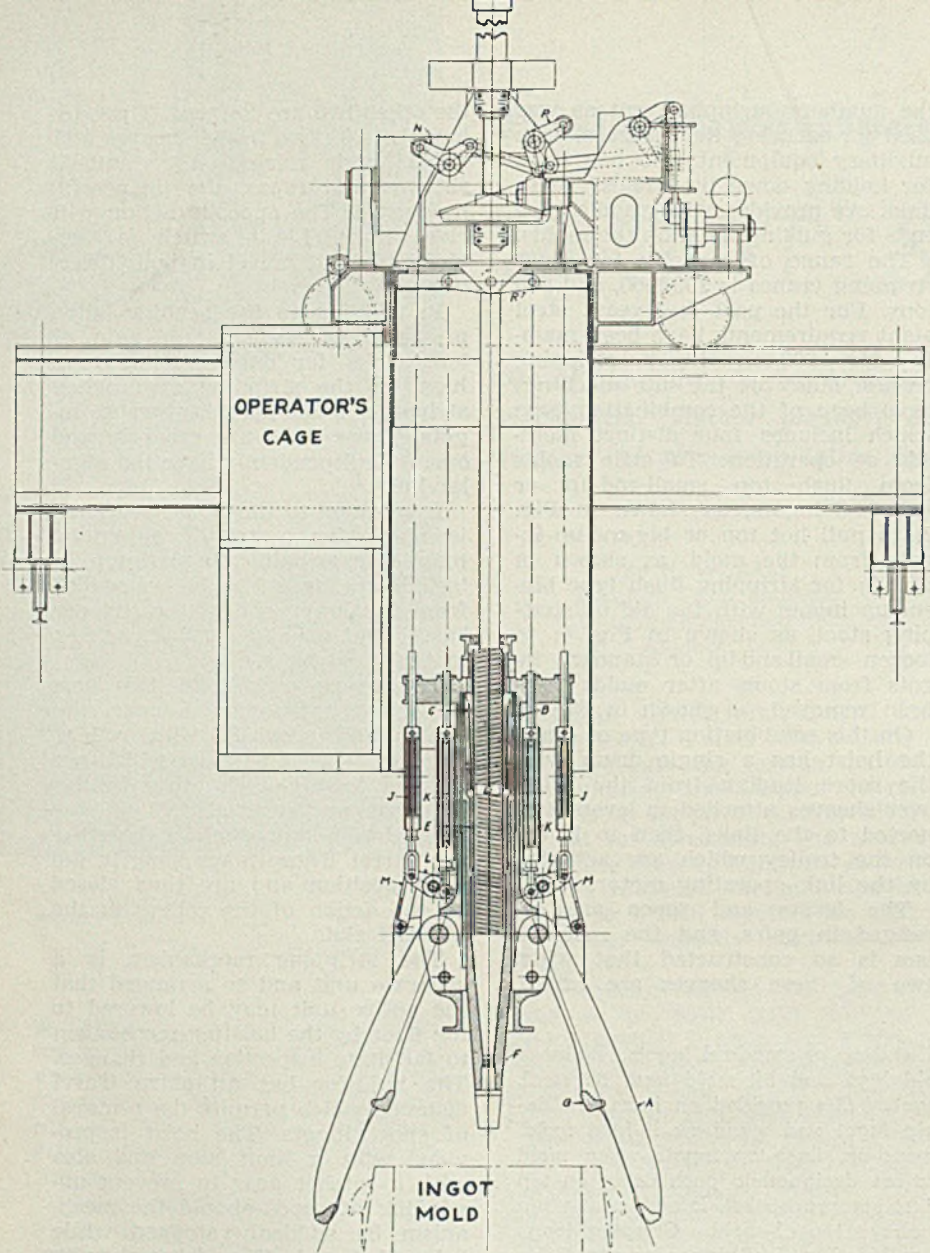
Cross section of trolley showing screw-type stripping mechanism
